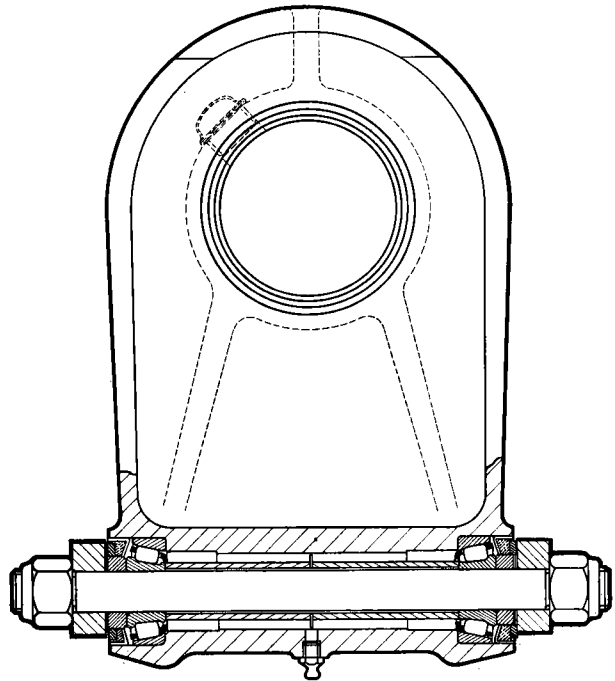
Section through hub carrier and wishbone showing outer fulcrum shaft in position
